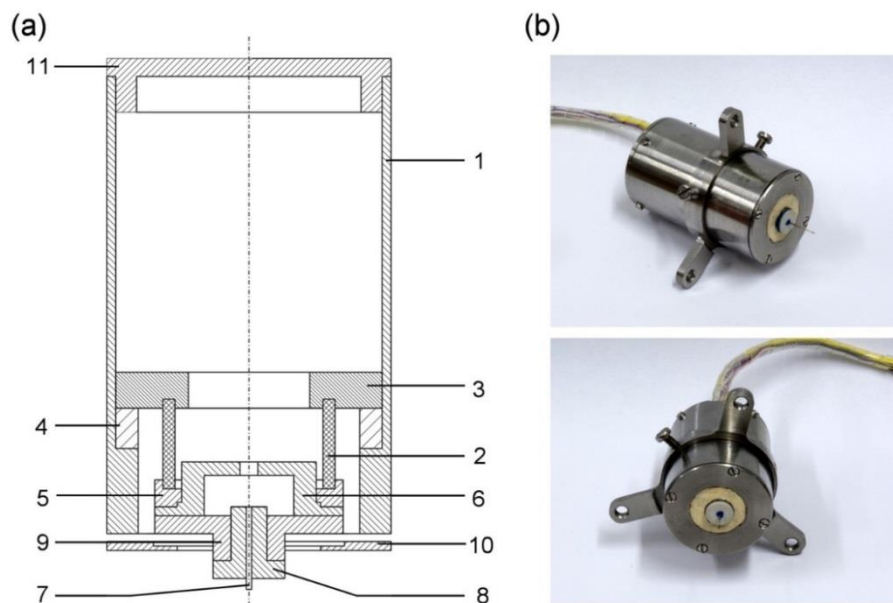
(a) Drawing of the STM scanner (not in scale): 1 - scanner housing, 2 - piezo tube, 3 - socket made from MACOR, 4 - stainless steel ring, 5 - MACOR ring, 6 - stainless steel socket, 7 - tip holder, 8 - PTFE rod, 9 - stainless steel flange, 10 - flange of the below, 11 - stainless steel cover. (b) Photographs of the STM scanner. Reproduced from ref. [1]
